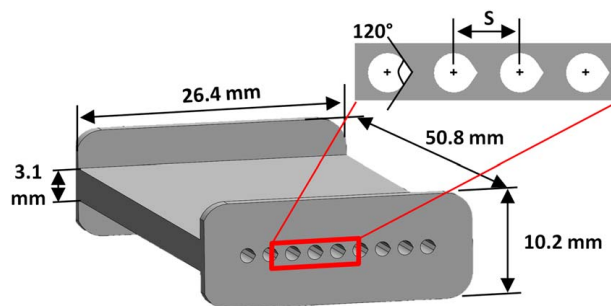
Schematic of overall coupon dimensions used for experimental testing
